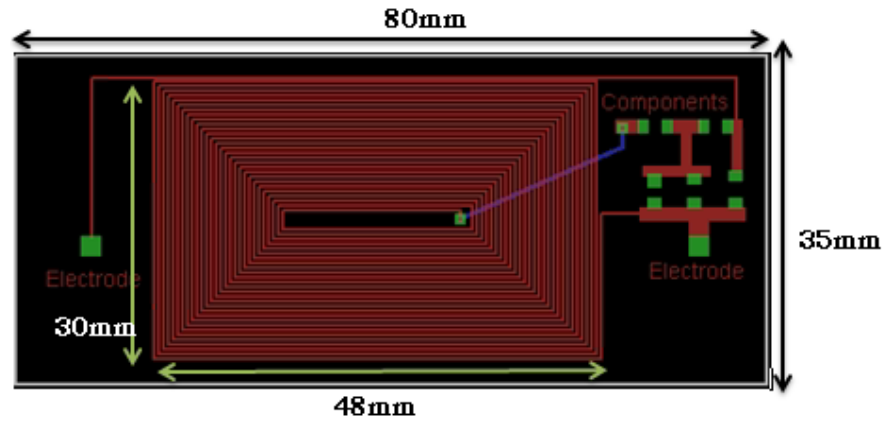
11: Schematic diagram of Printed Circuit Board (PCB) Sensor
